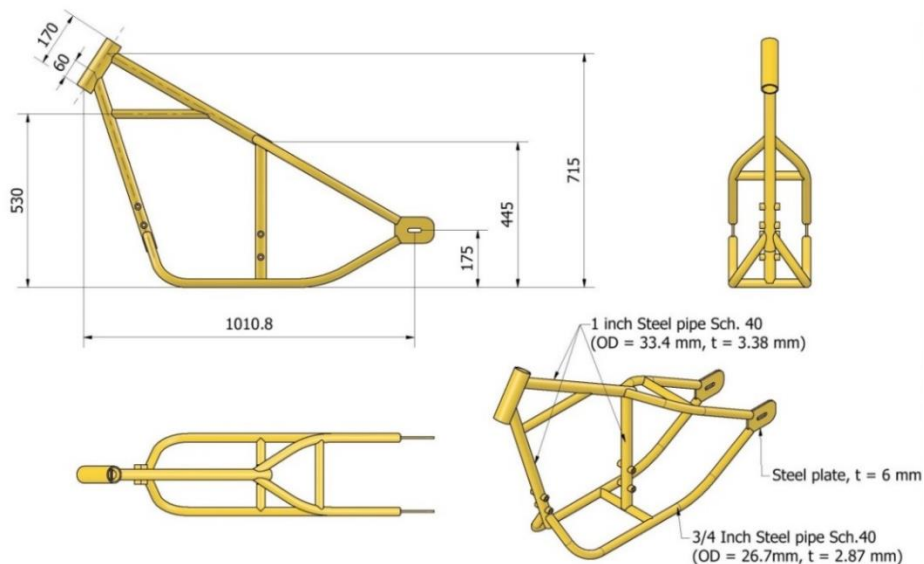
Design Geometry of Chopper-Style Motorcycle Chassis Frame
